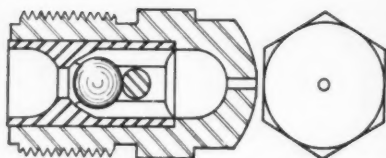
Cross-Sectional Drawing of Ball Check Nozzle
